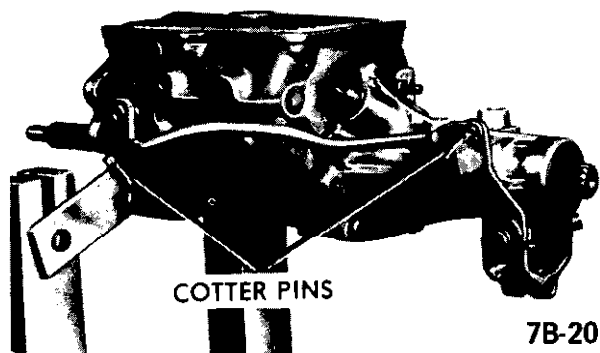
B-20 Cotter Pin Locations on Shifter Shaft
